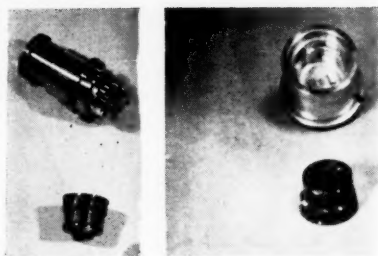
(L.) Machined Force and (R.) Hobbed Cavity for Plug Made in 63-Cavity Stripper Plate Mold
